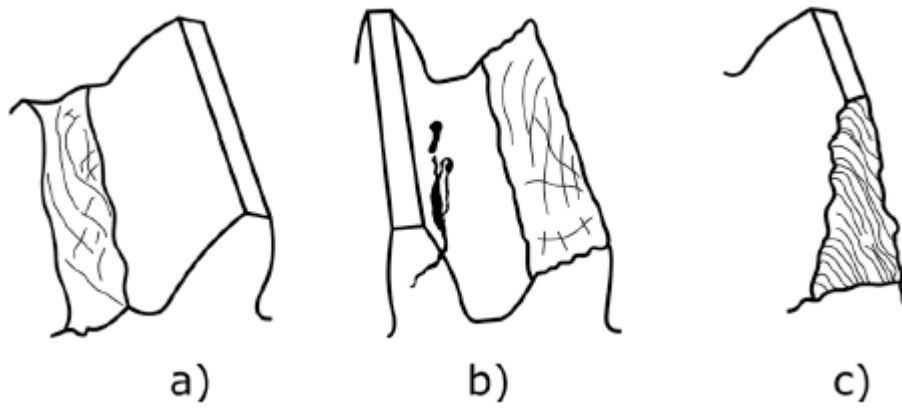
Tooth fractures: a) fatigue fracture at the base of the tooth, b) fatigue fracture in the area above the base, c) fatigue fracture of part of the tooth.
